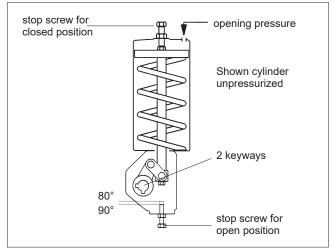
Example of spring-to-close pneumatic actuator stop screw adjustment in B1J series
